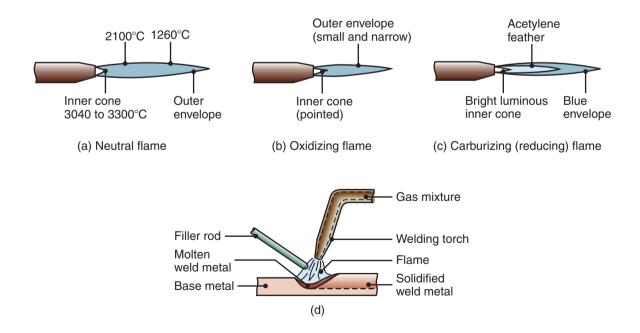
Three basic types of oxyacetylene flames used in oxyfuel–gas welding and cutting operations: (a) neutral flame; (b) oxidizing flame; (c) carburizing, or reducing, flame. The gas mixture in (a) is basically equal volumes of oxygen and acetylene. (d) The principle of the oxyfuel–gas welding process.
